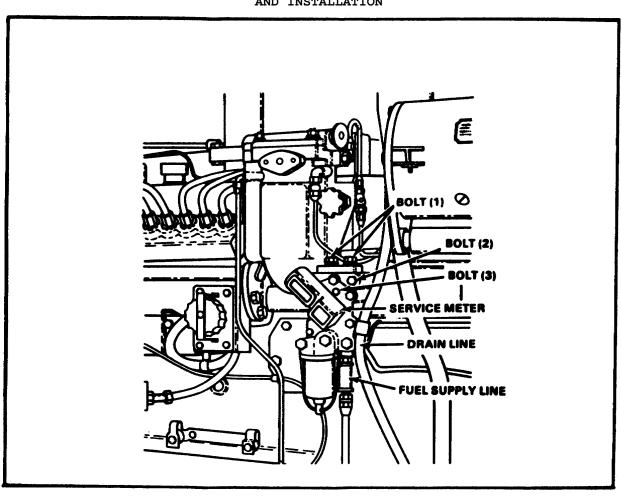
FUEL TRANSFER PUMP REMOVAL AND INSTALLATION
